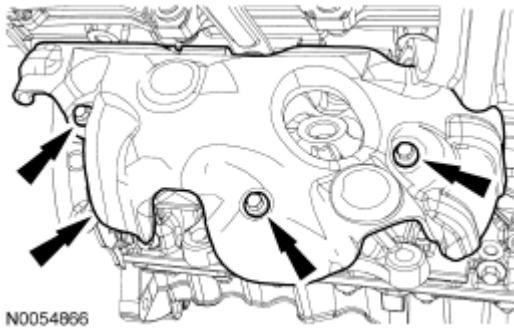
Locating RH Exhaust Manifold Heat Shield & Nuts
